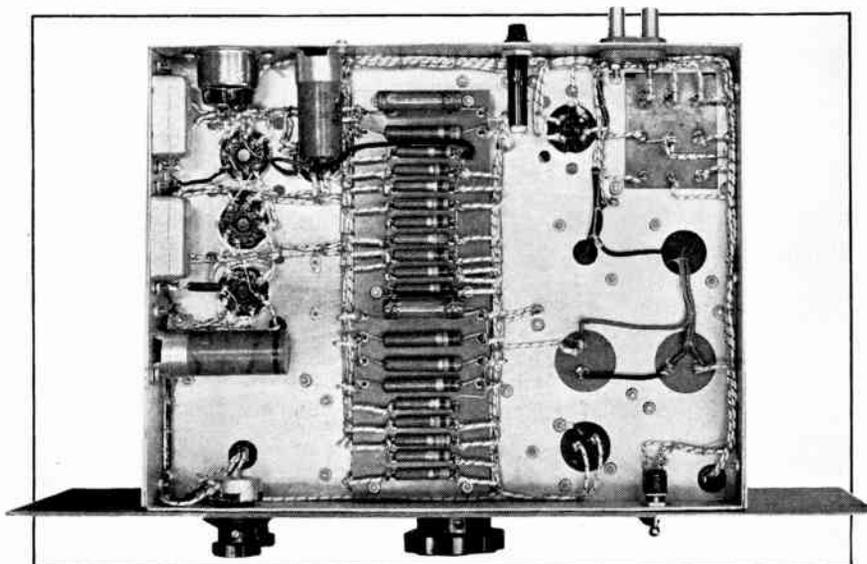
UNDER SIDE OF OSCILLATOR CHASSIS SHOWS WIRING CENTERED AROUND THE RESISTOR MOUNTING BOARD
